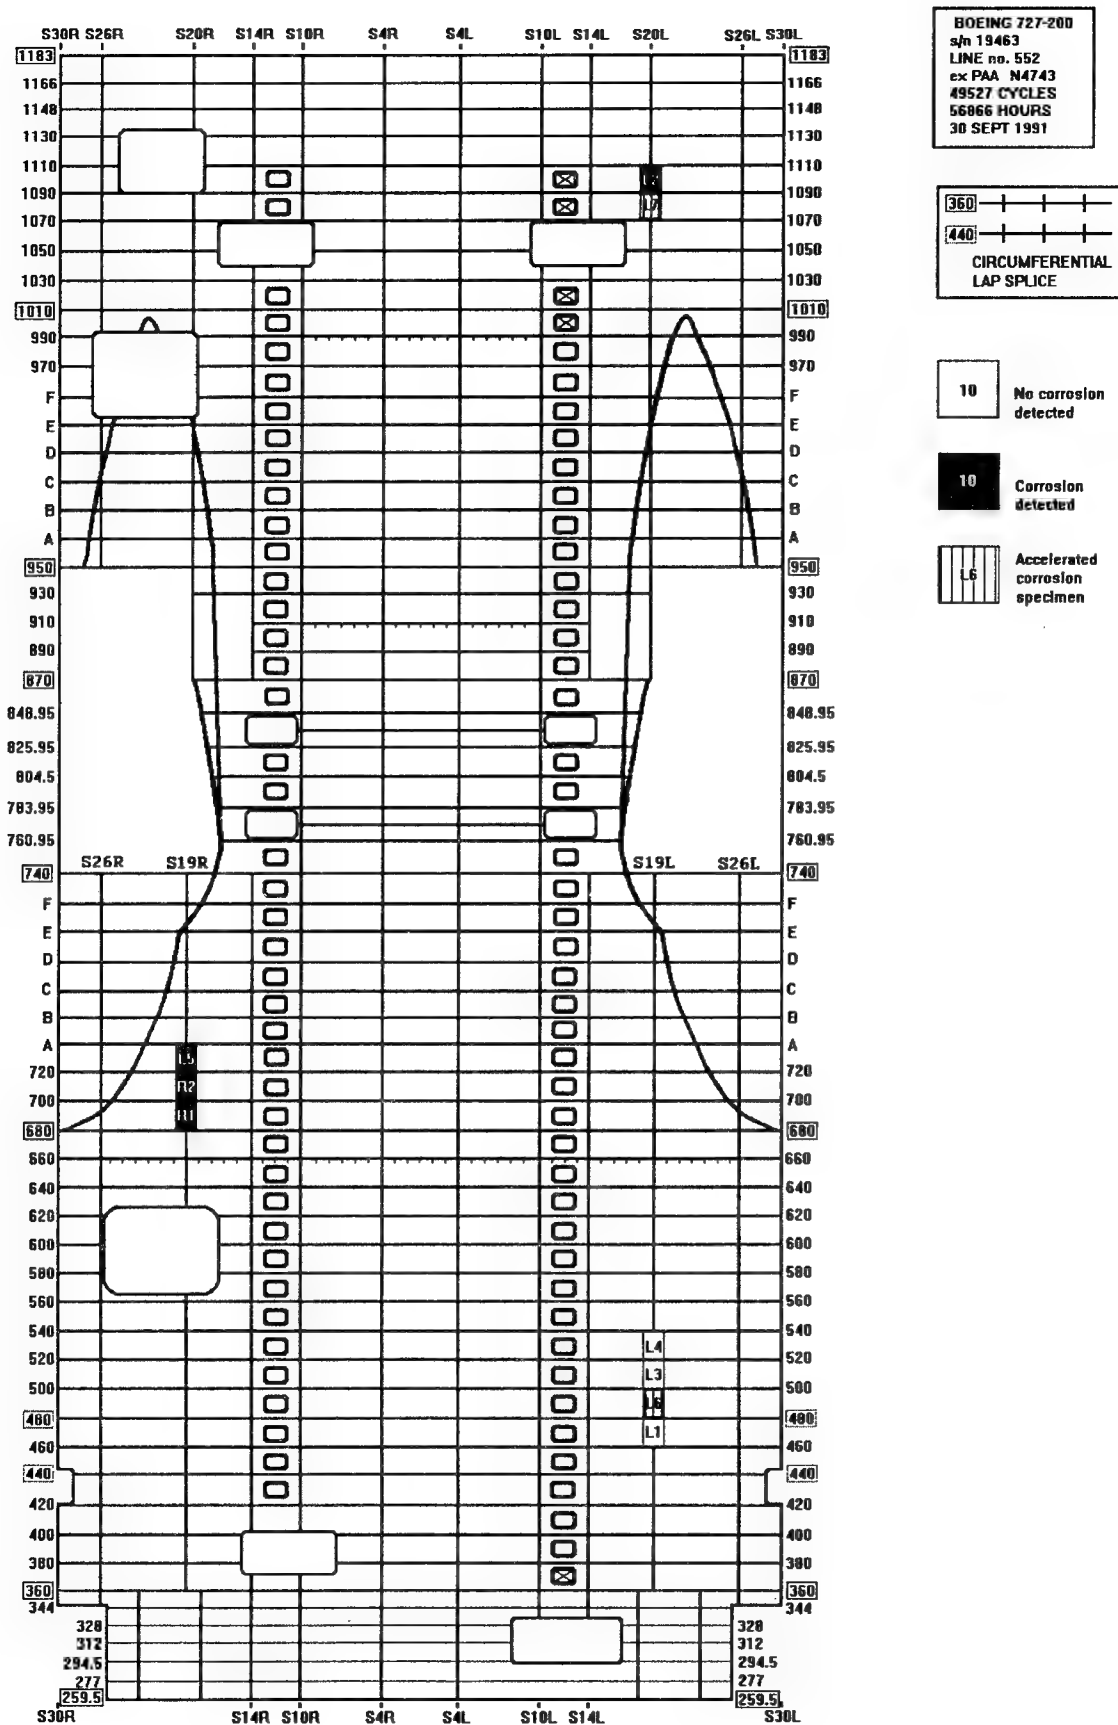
B727-N4743 specimens. Results of D Sight inspection for corrosion.
